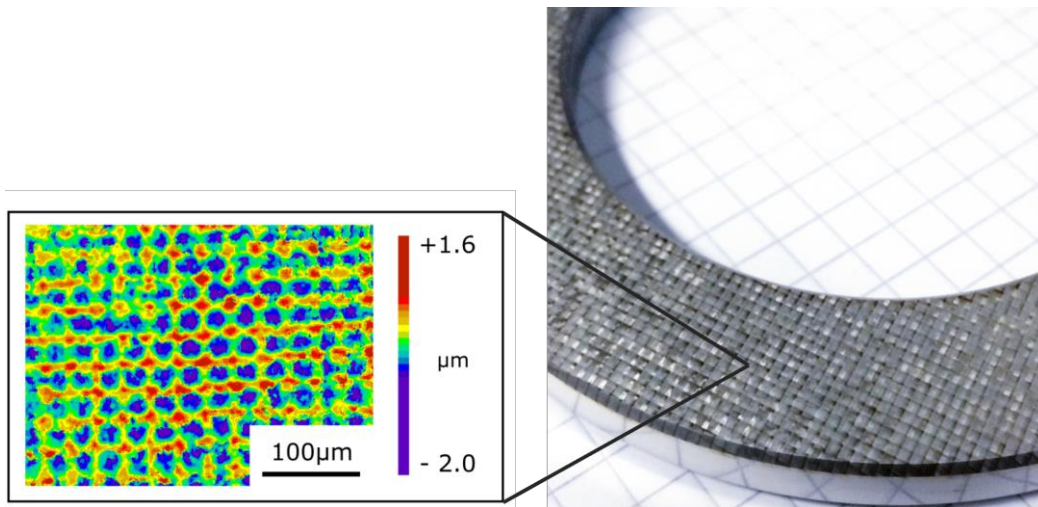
Surface morphology of a laser textured thrust roller bearing (lower washer) with cross-like periodic patterns having periodicity of 30 μm textured by DLIP.
